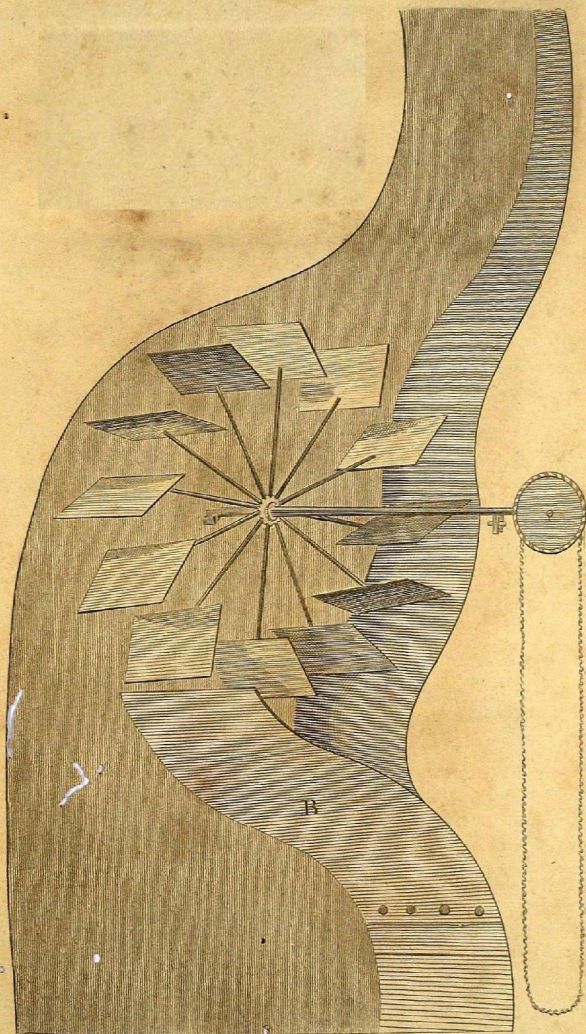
Plate II. is a sectional view of one side of a flyer, drawn to a scale supposed to be two feet six inches in diameter, which will be found large enough for common use; it has twelve floats or fans, marked from No. 1 to 12, but the number may be more or less, as shall be found most convenient. They may be supported from the centre by twelve arms, or by an arm at each end of the flyers, or by rings, or in a water-wheel, or by any other mode which the maker may
